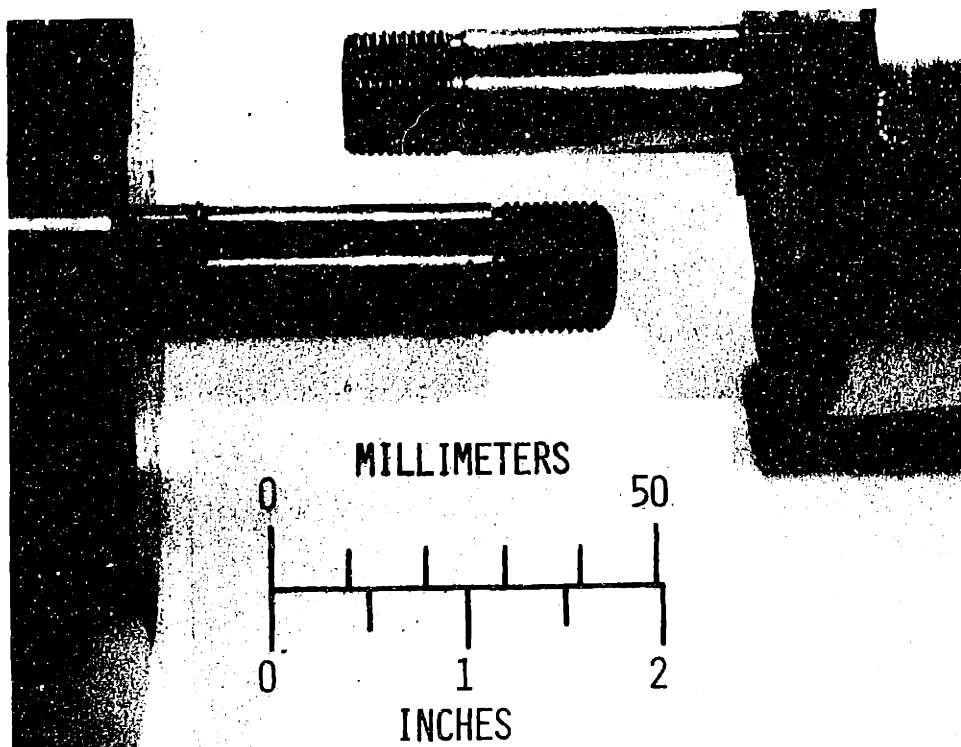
Modification to the alternator rotor. Note the chamfer to the right of the threads on the top rotor. Bottom rotor is not modified.
